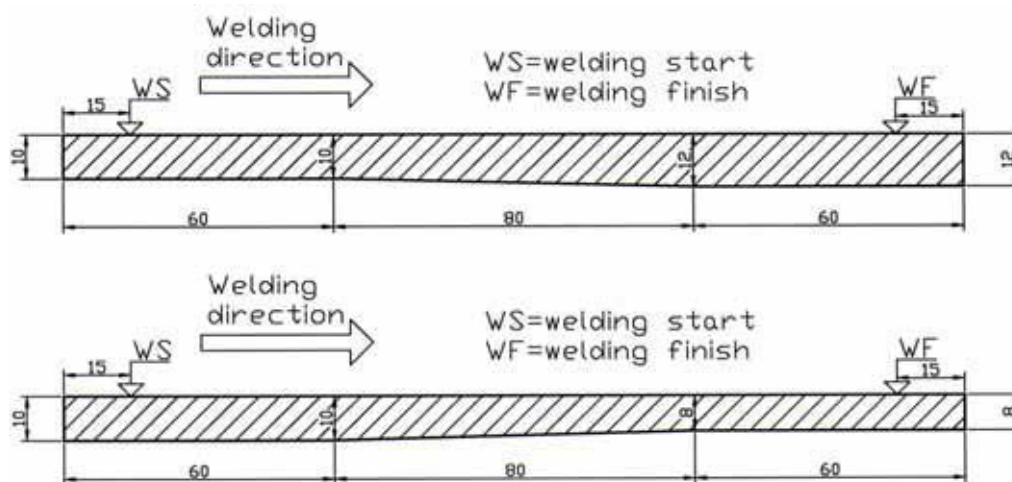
Presentation of welding procedure. Above: test piece 10D12. Below: test piece 10D8.
